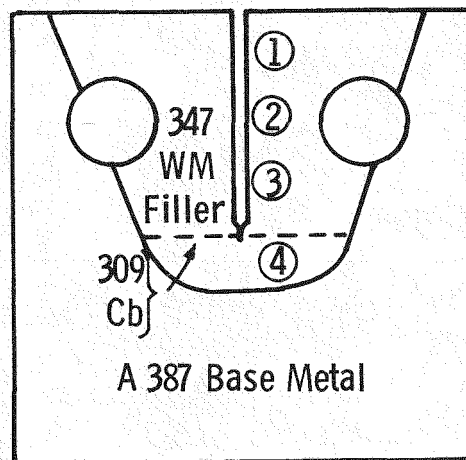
Composite weld metal - Base metal specimen for weld overlay material evaluation
